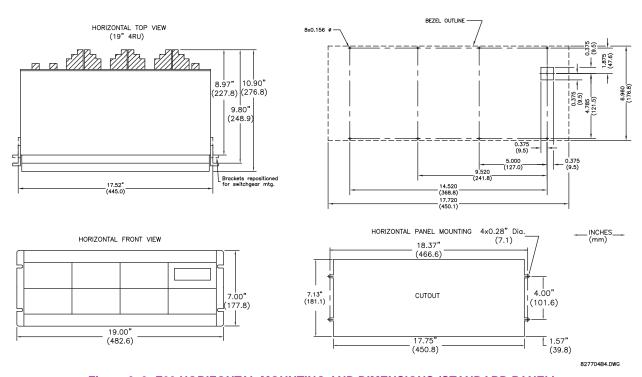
F60 HORIZONTAL MOUNTING AND DIMENSIONS (STANDARD PANEL)
